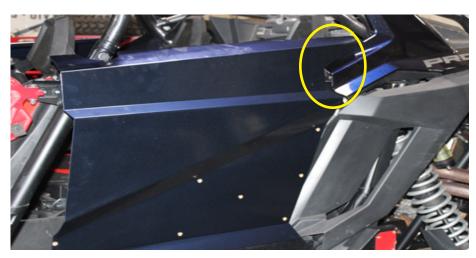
Inspect for quarter panel clearance and adjust hinges using 13mm Socket as needed
